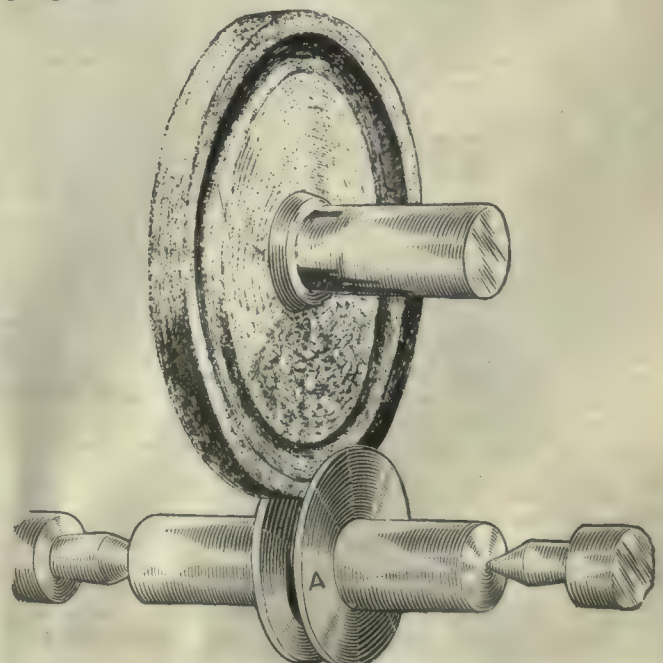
DIAGRAM OF HOLDING AND GRINDING METHOD
